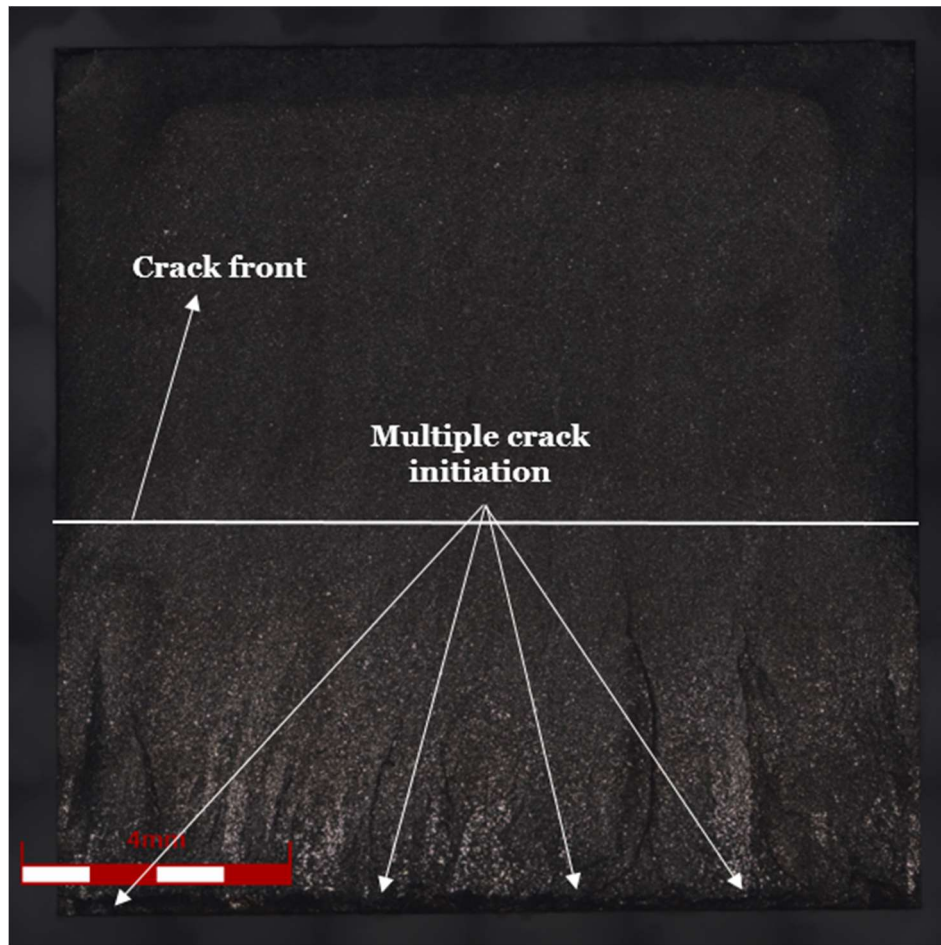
Confocal photograph of the fracture surface for the specimen under the contact of the cylinder pad with radius  $R=70\text{mm}$ .
